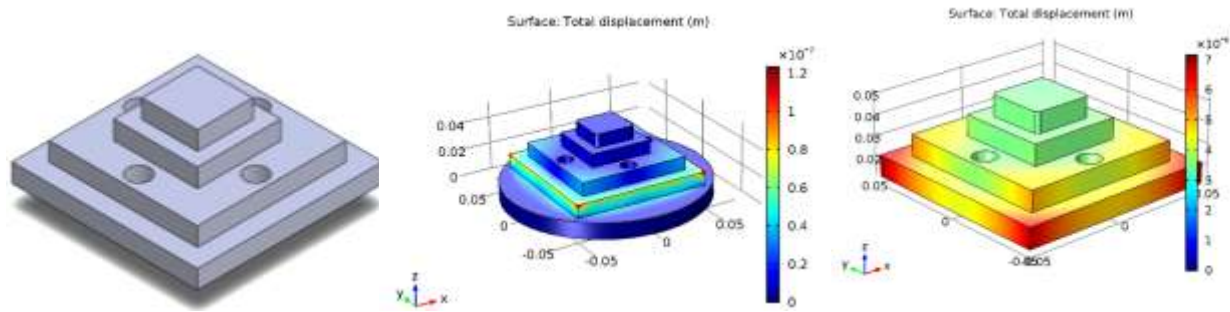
Workpiece design(left), Displacement of workpiece with(middle) and without(right) fixture.
